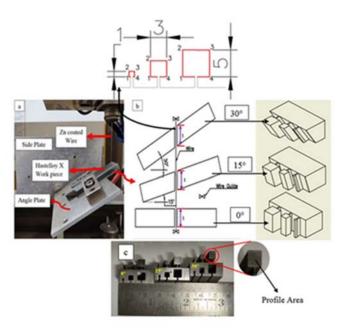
(a) Workpiece at different slant angle by slant fixture (b) Slant Fixture (c) Area of the profile.
